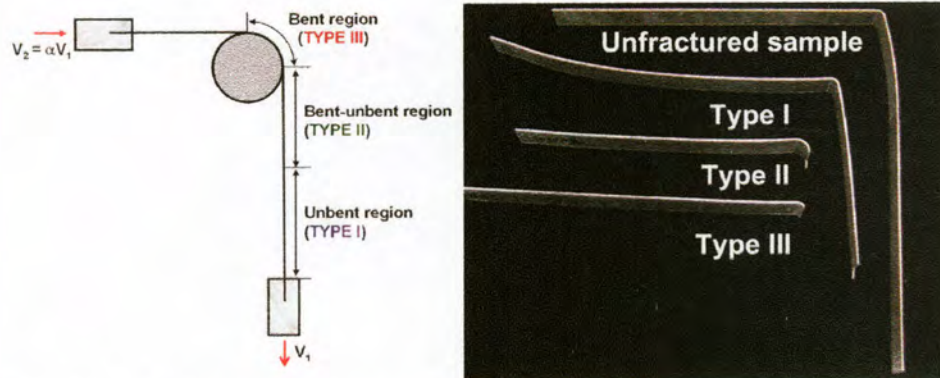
OSU-Draw bending test and the tested samples with various fracture types
